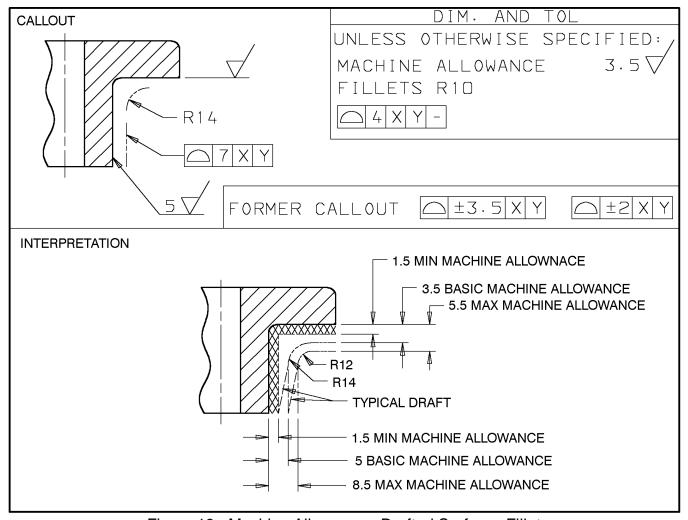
Machine Allowance - Drafted Surface - Fillet
